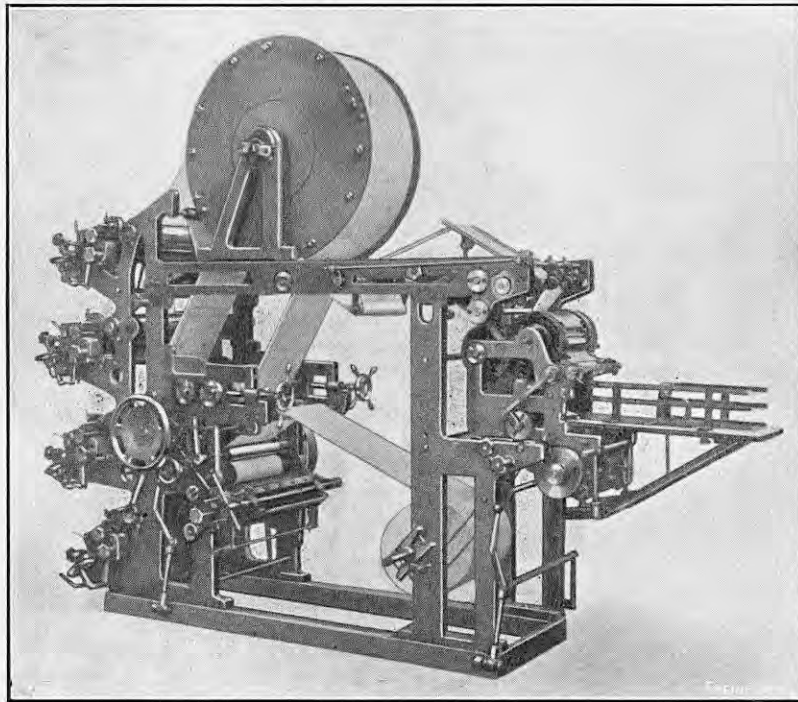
PAPER-SERVIETTE MACHINE; ROBERT GIEBELER.
